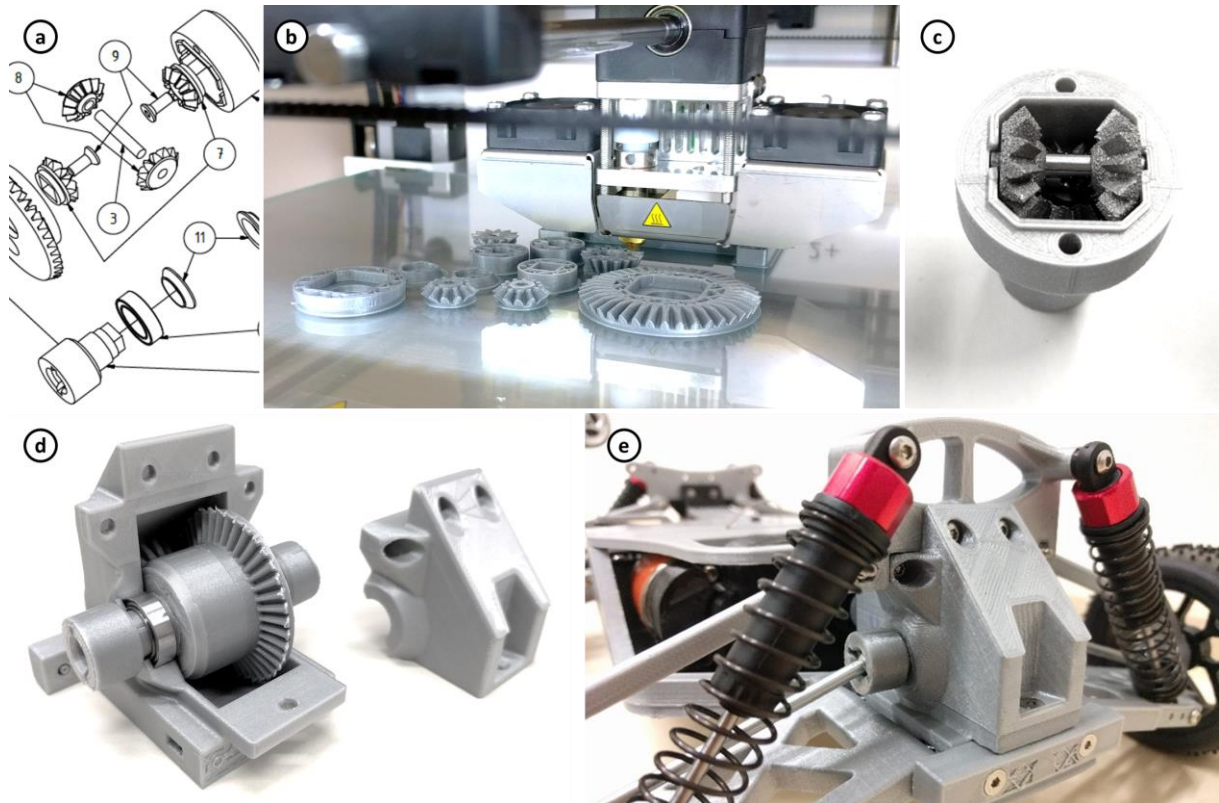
Process for the additive production of a differential gear a) predefined production drawing b) FLM process c) FLM housing in combination with SLM gear wheels d) assembly with purchased parts e) installation in vehicle
